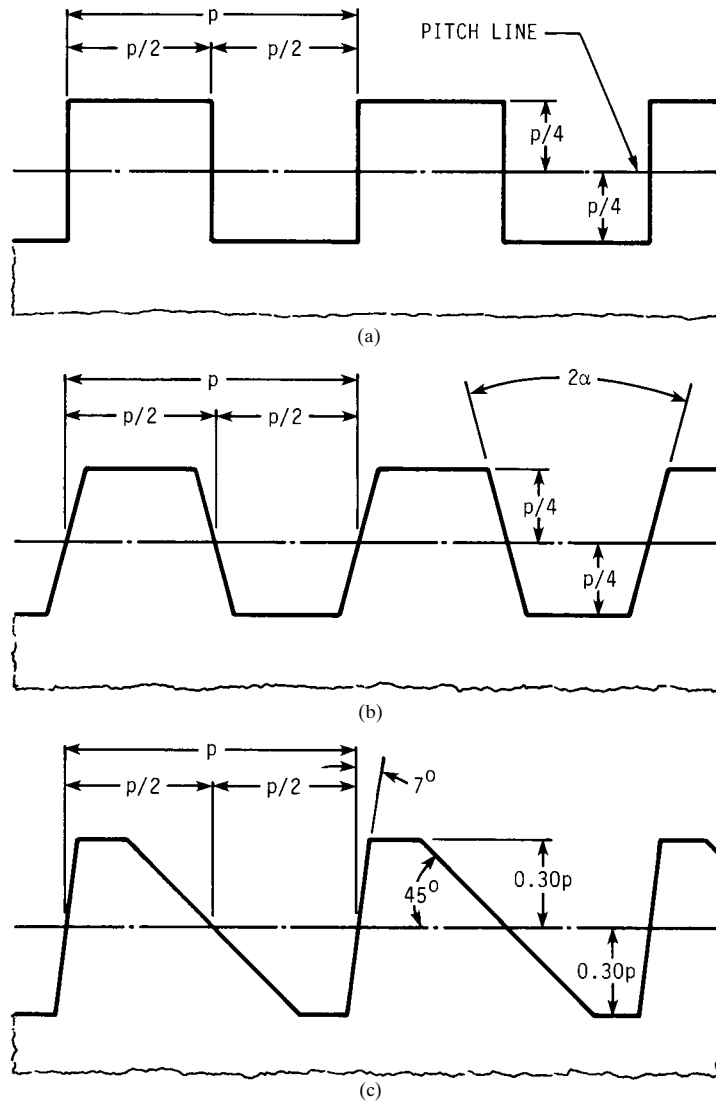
Basic thread forms. (a) Square; (b) general-purpose Acme; (c) buttress. The stub Acme thread height is $0.3p$.
